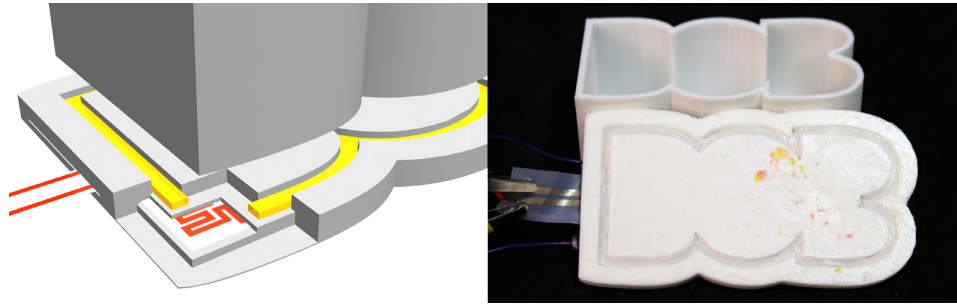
Sealing a complex contour: close-up cutaway model and realized prototype.
